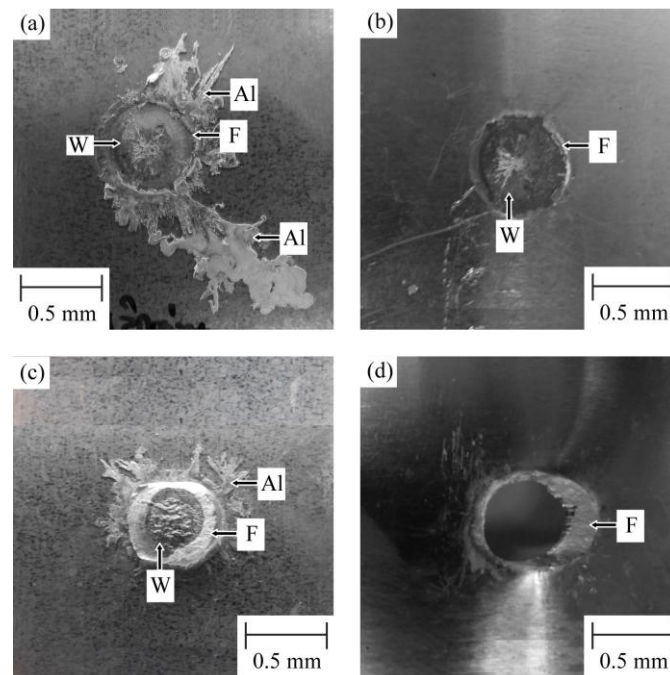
Fracture surface of tensile shear specimens: (a) an interface fracture of Fe side-type I lap joint, (b) an interface fracture of Al side- type I lap joint, (c) a weld metal surface of Fe side- type II lap joint and (d) a weld metal surface of Fe side- type II lap joint. (W=welded area, F=fracture location, loading direction was right to left.)
